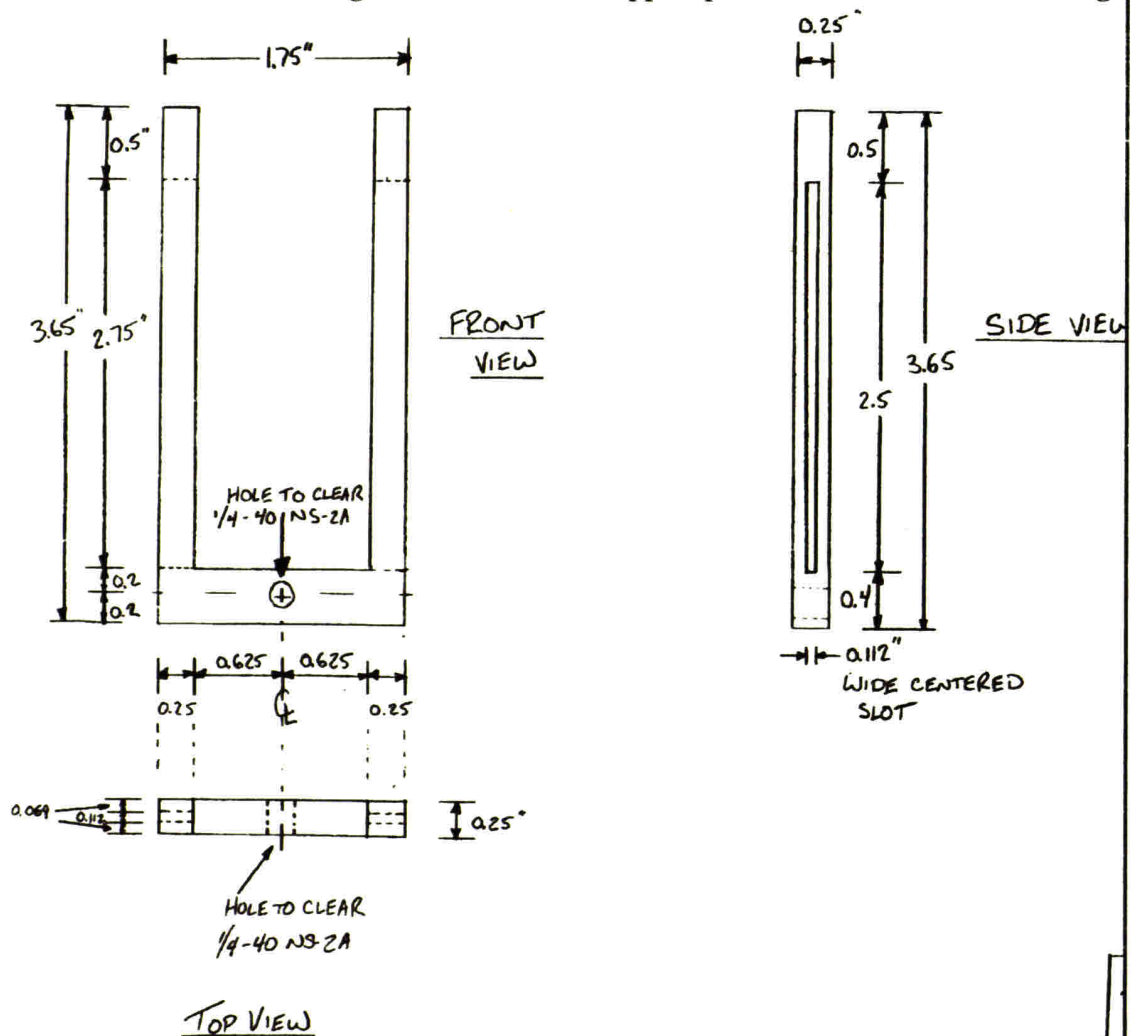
Mechanical drawing of the proximity sensor holder.
